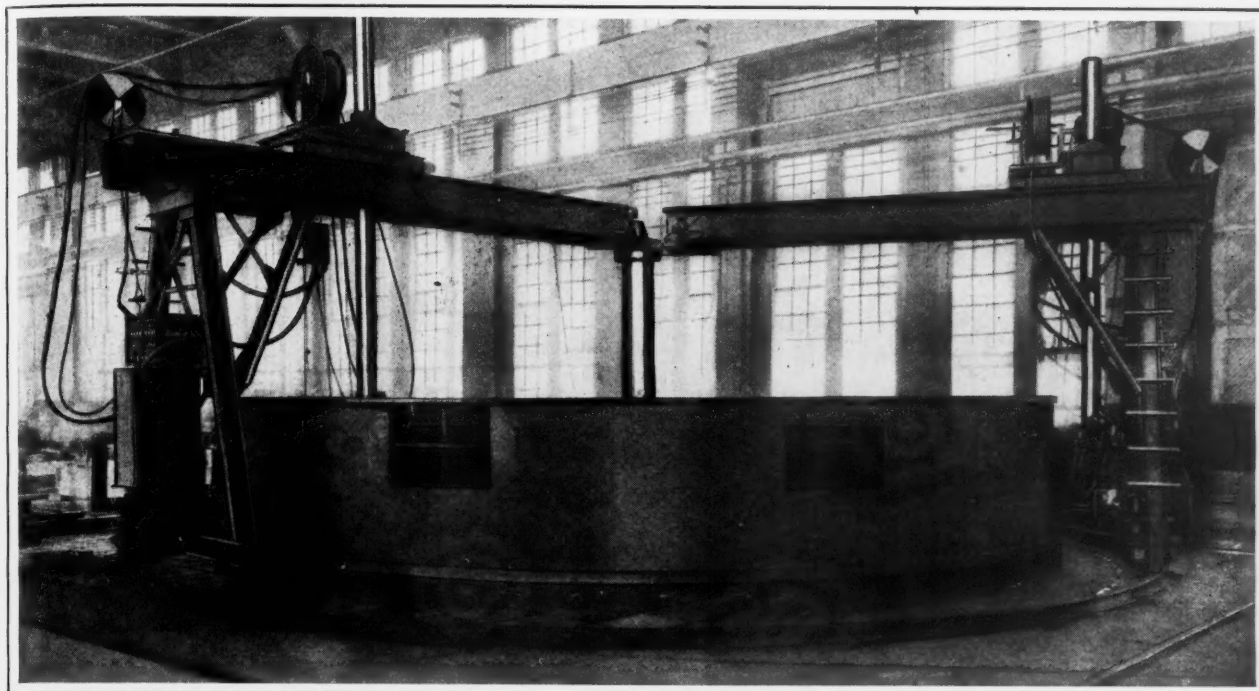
Another Automatic Welding Machine in which Two Welding Heads can be Moved Around Work up to 40 Feet in Diameter
